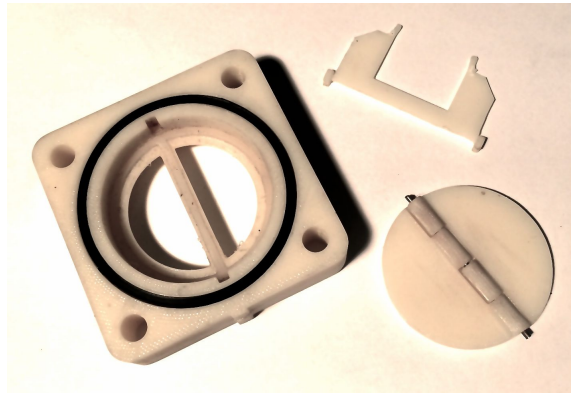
The  $\Theta$ -shaped door seal inside the assembly
